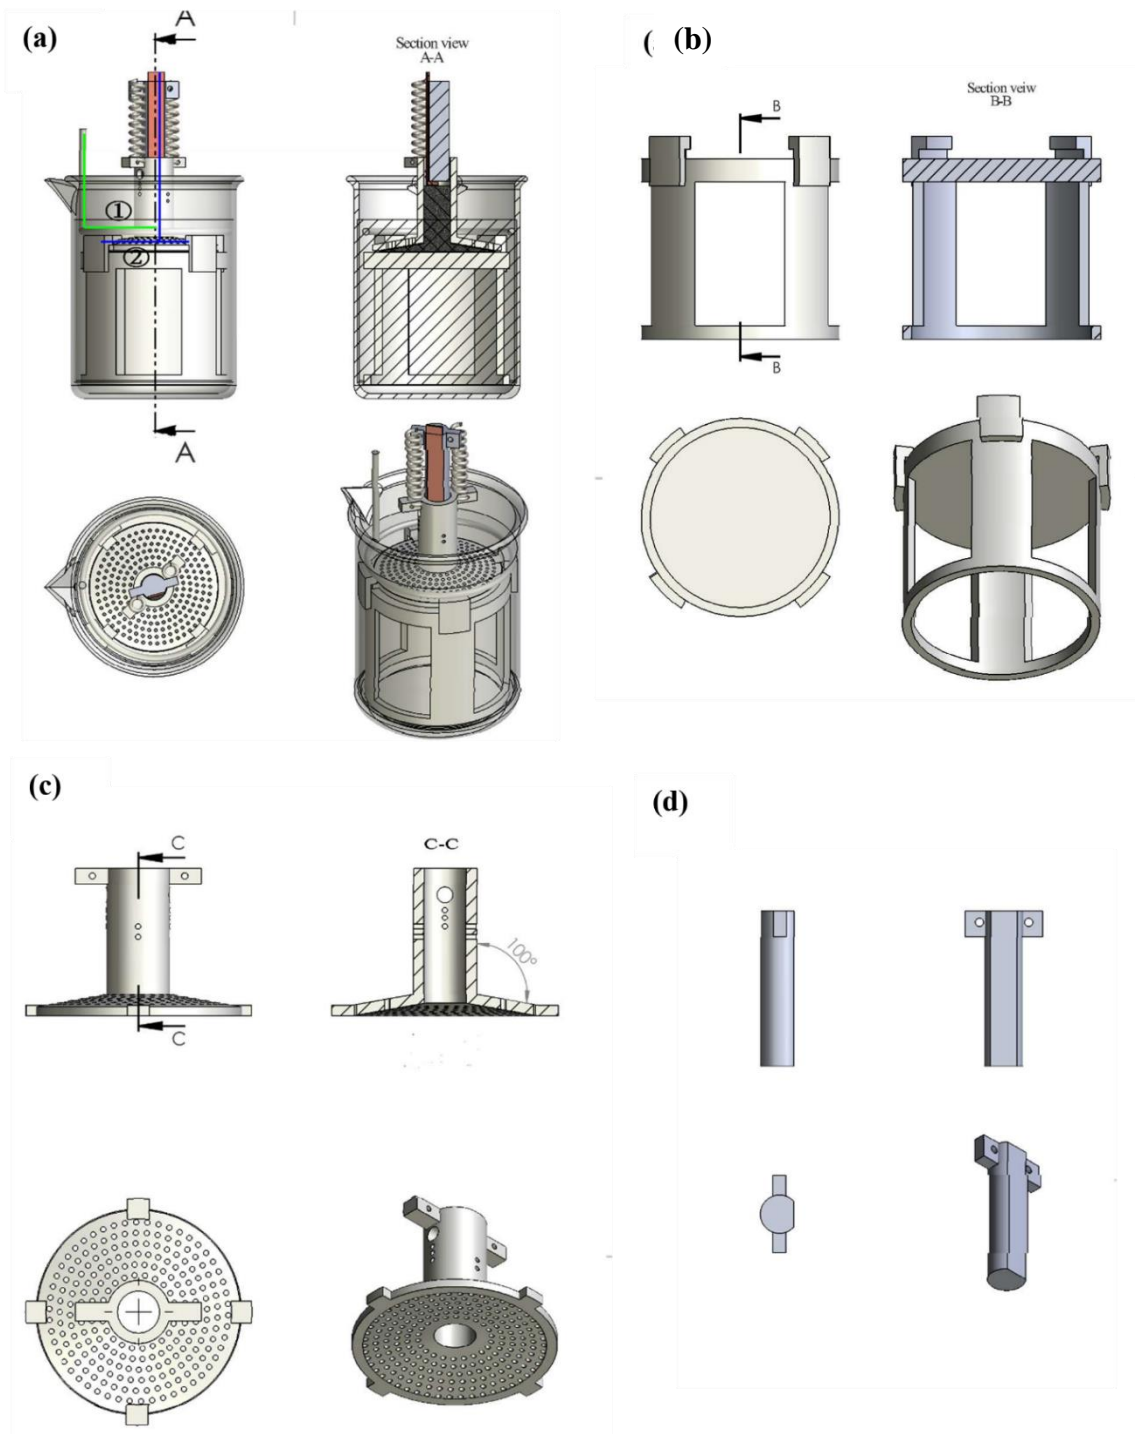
2. Engineering drawing of (a) exfoliation cell, (b) Holder, (c) Cover, (d) Plug
